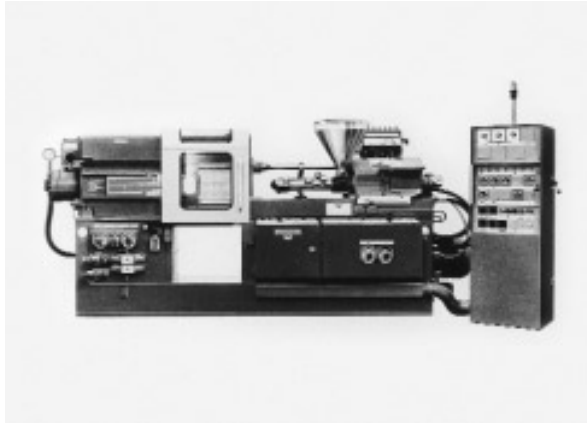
· ANKER (R) Screw-type automatic injection moulding machine. Locking Assemblies RfN 7012 are used for securing the cranks actuating the clamping plate.
